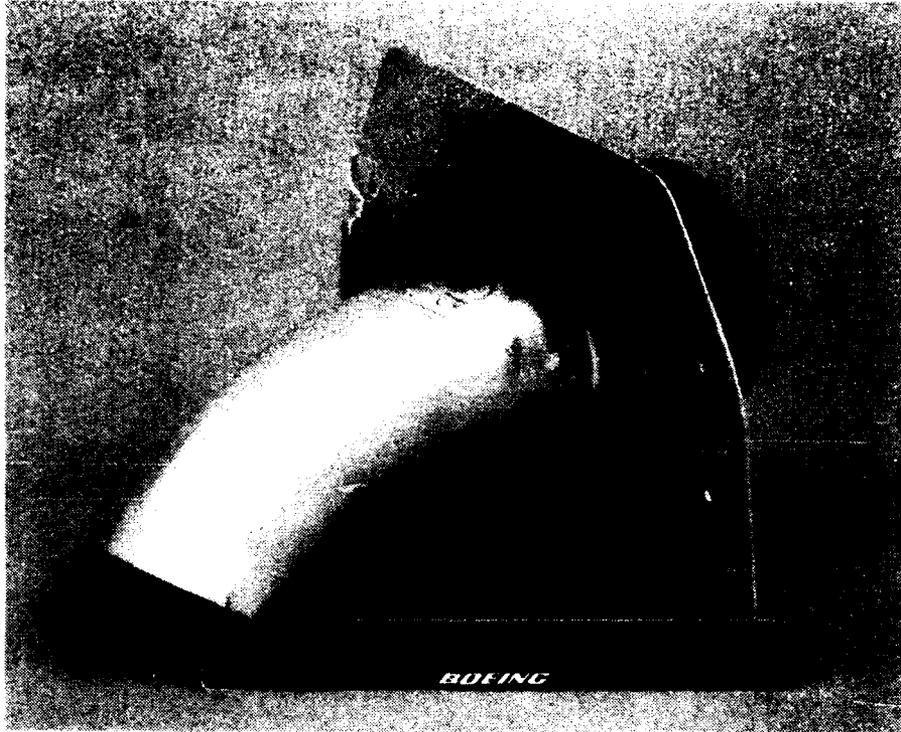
Photograph of aluminum ducting tack welded to mounting brace.
